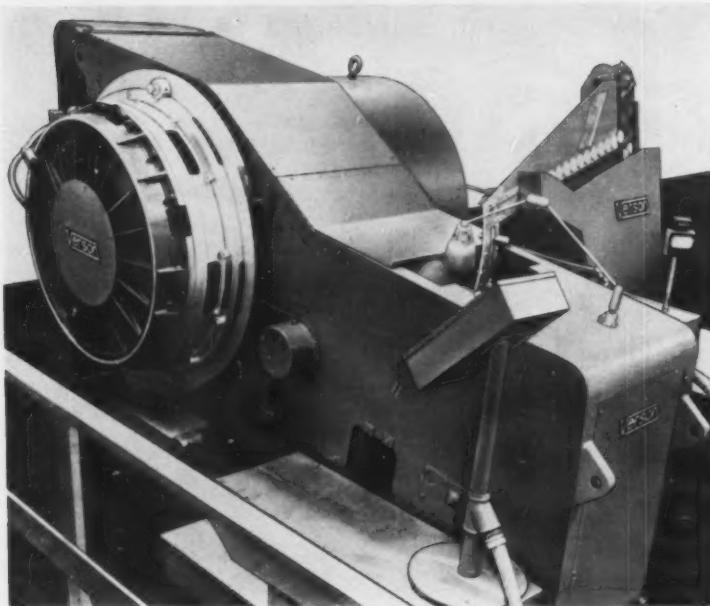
Extrusion press rapidly converts aluminum slugs into cans
